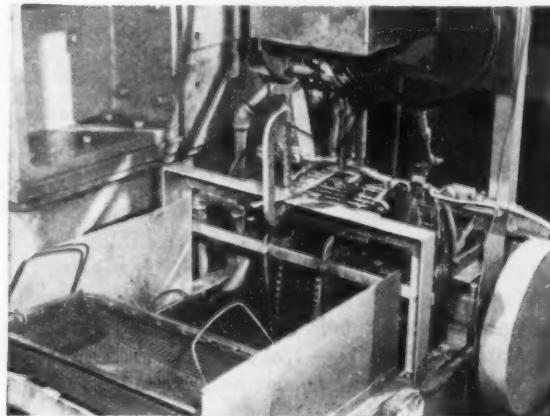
Close-up of a drum which rotates slowly and carries valve push rods through an induction coil to be heated to quenching temperature. The rods drop from the drum into the quenching tank below.
